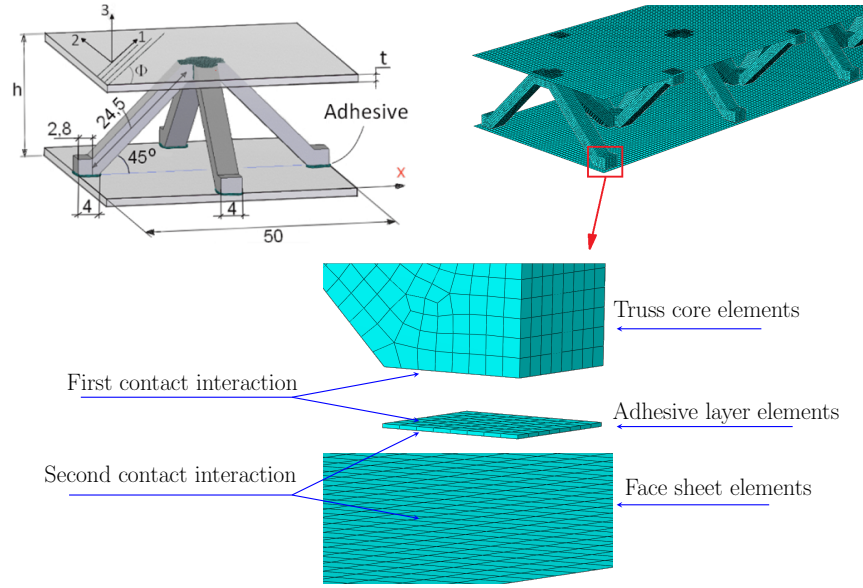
Sandwich beam assembly: (top left) single unit cell; (top right and bottom) numerical model assembly.
